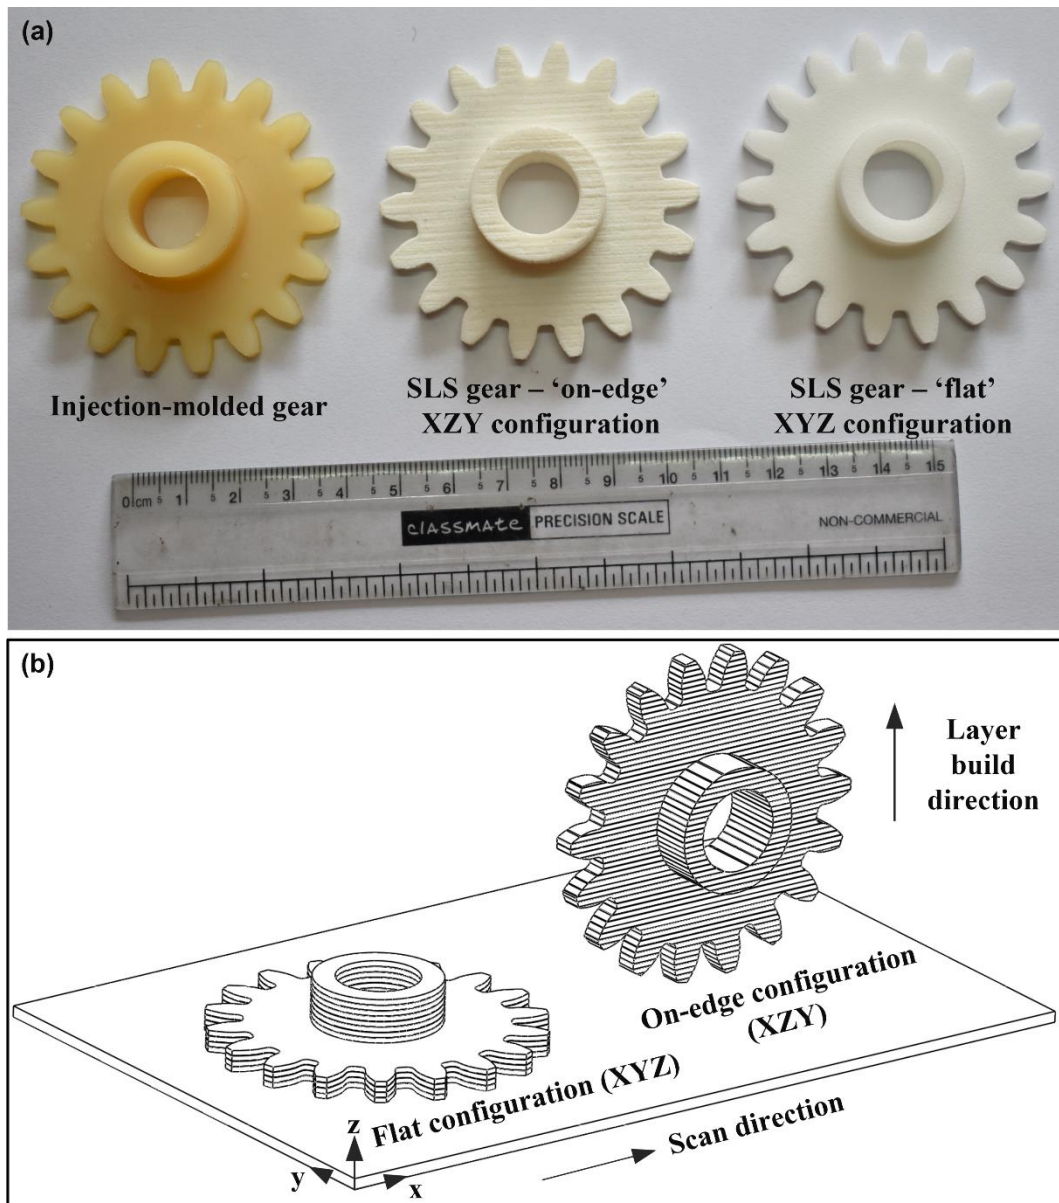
(a) Selective laser sintered and injection-molded gears and (b) Schematic representation of gear build configuration during selective laser sintering process.
